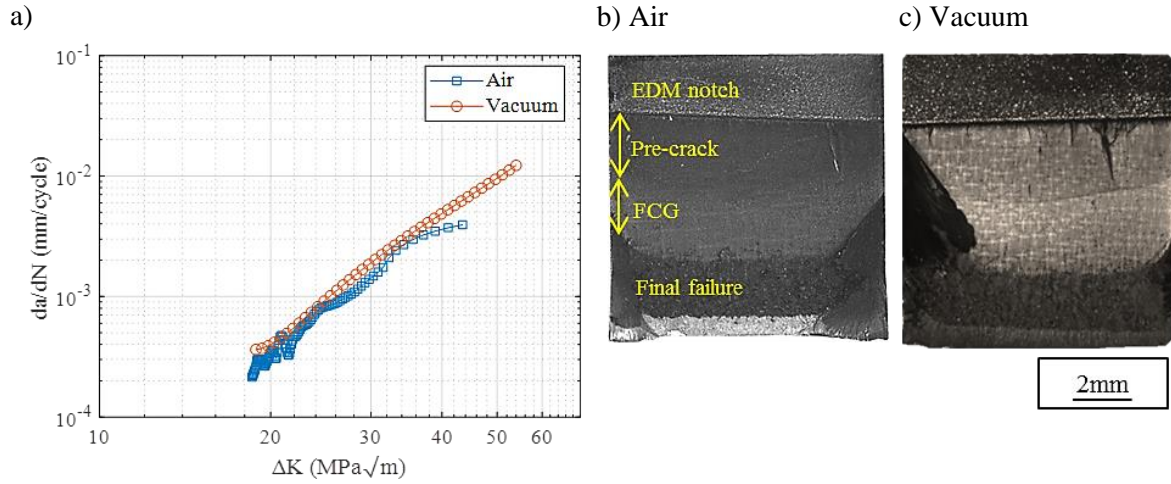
a) Fatigue crack propagation rates in air and vacuum for CMSX-4 at 550°C, b) and c) fracture surface overviews of the air and vacuum tests.
